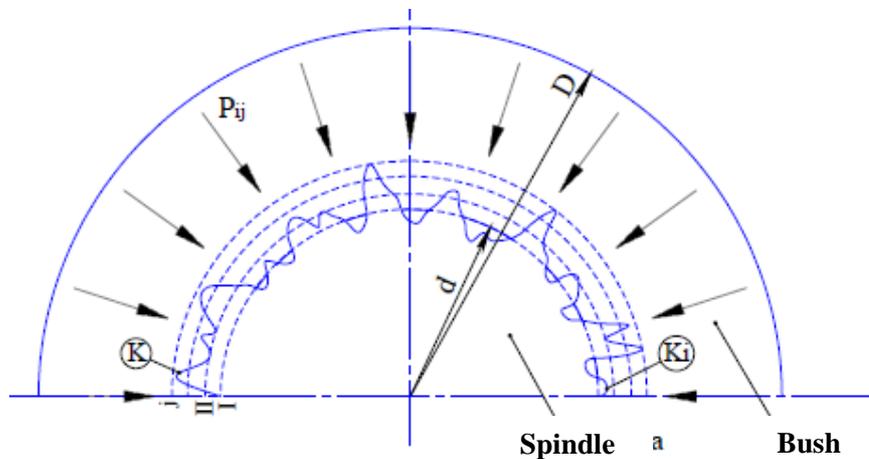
Contact schema of rough (spindle) and even (bush) surfaces of cylindrical surfaces:
